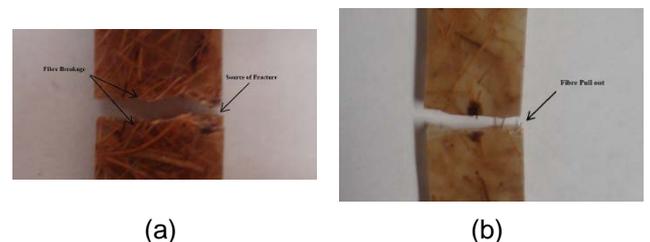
Sample fractured specimens (a) Flat (b) Fiber pull out
